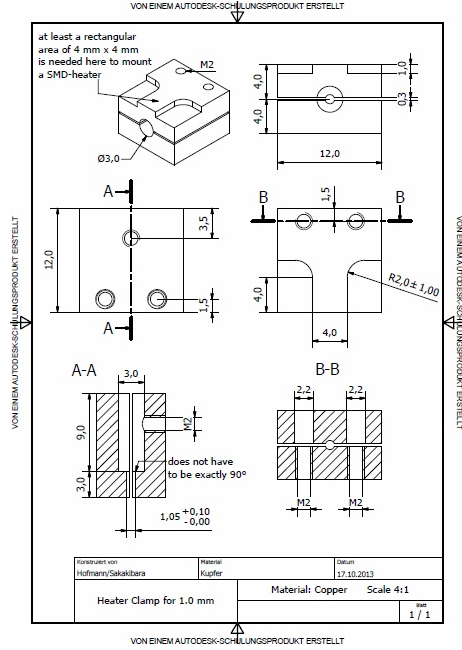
Drawing of a copper jig to attach the thermometer or the heater to the sample designed by G.Hofmann. In cross section of A-A, a hole with 1.05 mm in diameter contacts the sample and a M2 hole is used to attach the thermometer.
